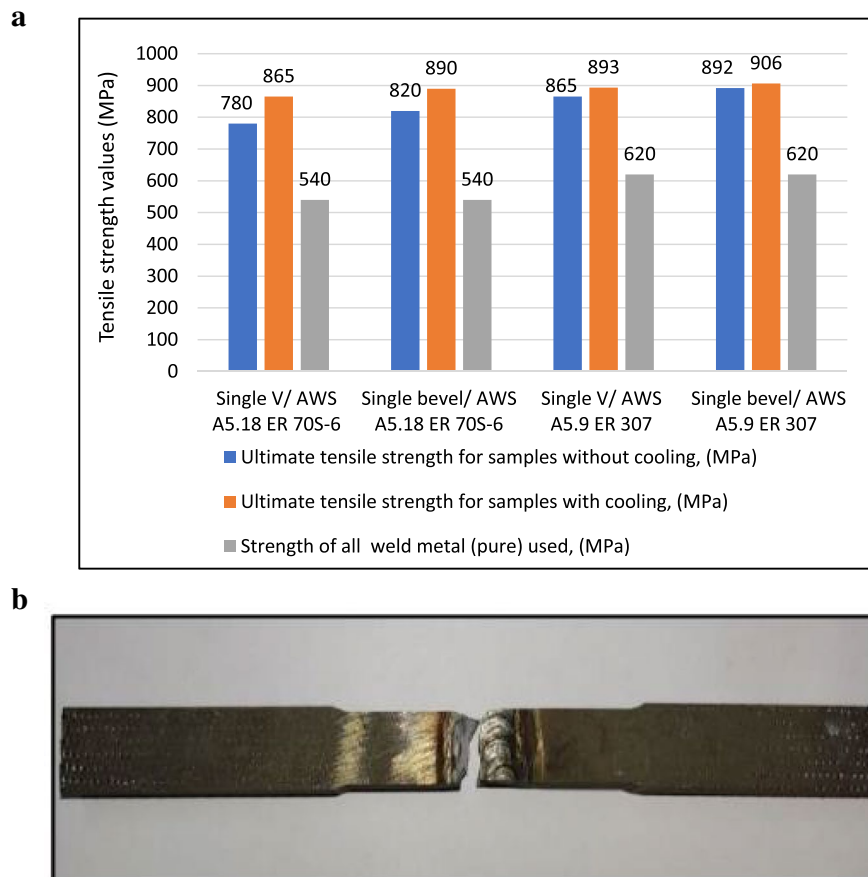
a Tensile strength of welded joints. b Fracture location of the tensile test specimens
